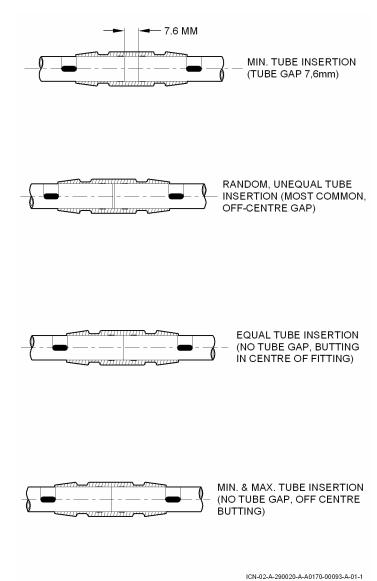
Permaswage Fitting - Installation (sheet 3/4)
